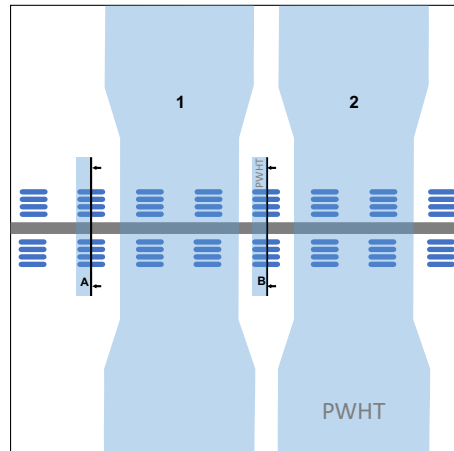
Illustration showing the tensile and hardness specimens of the welded sheet with laser pattern.
